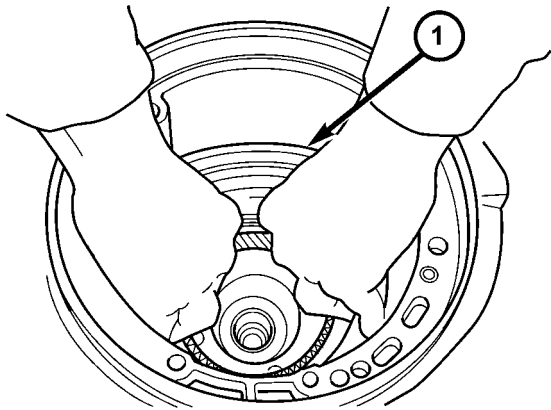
Remove 2/4 Clutch Retainer Snap Ring
